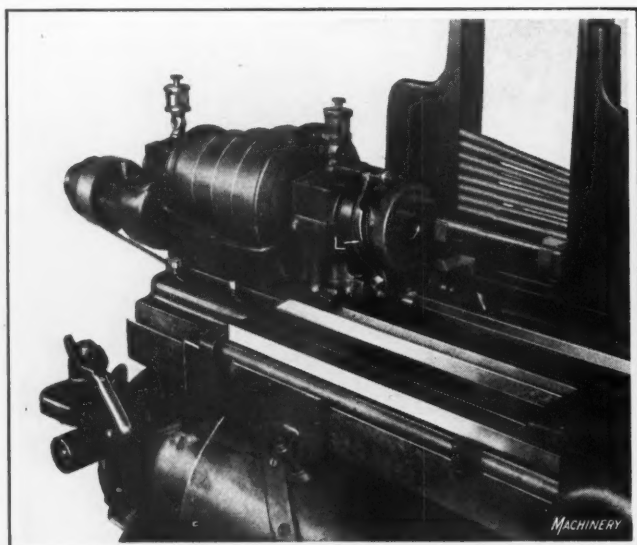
Close-up View of Head End of Machine, showing Chuck and Work-feeding Mechanism
